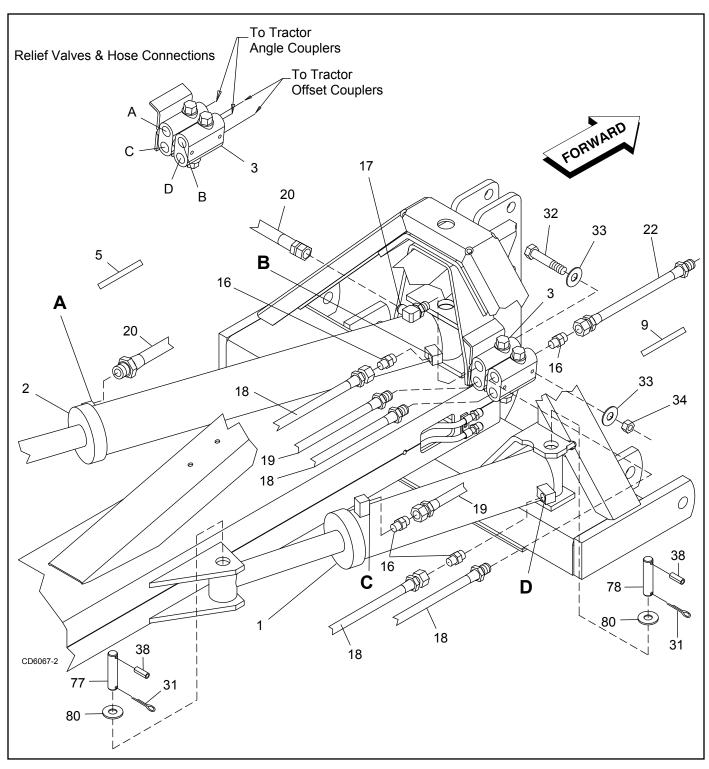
Hydraulic Offset Cylinder and Relief Valves Installation
